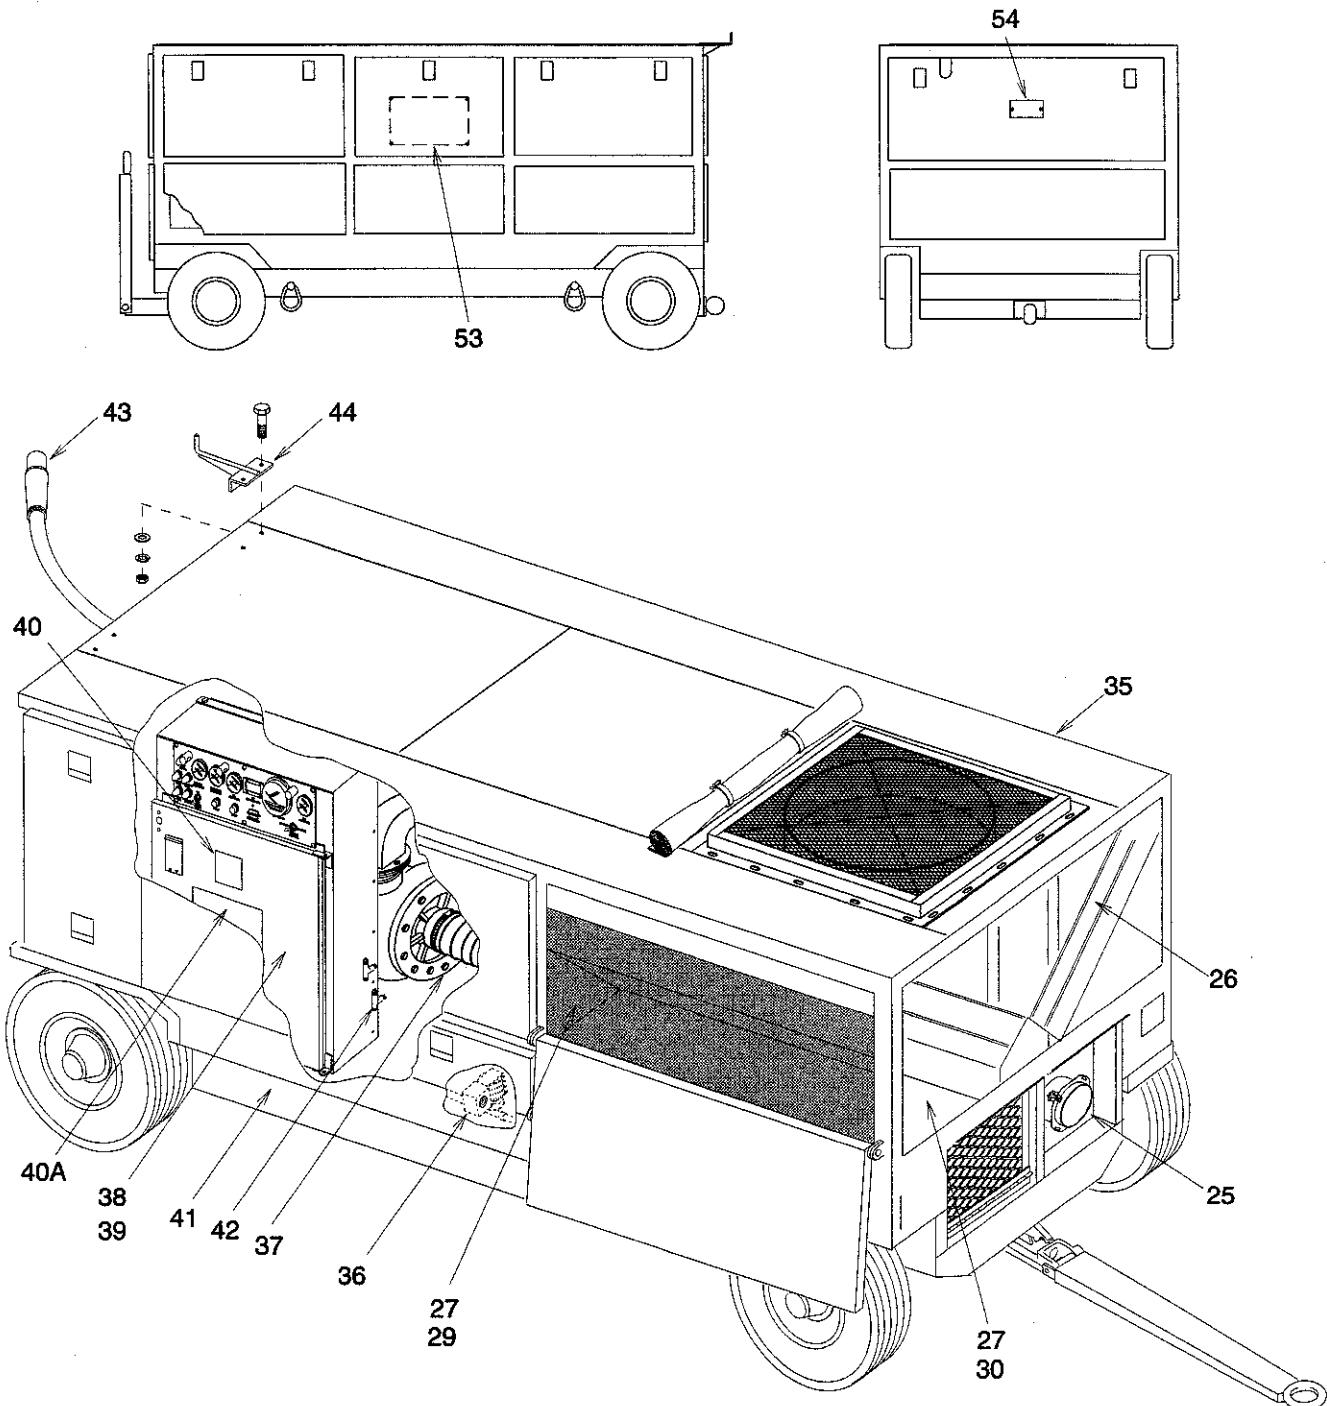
Air Conditioner, Trailer Mounted (Sheet 2 of 3)
